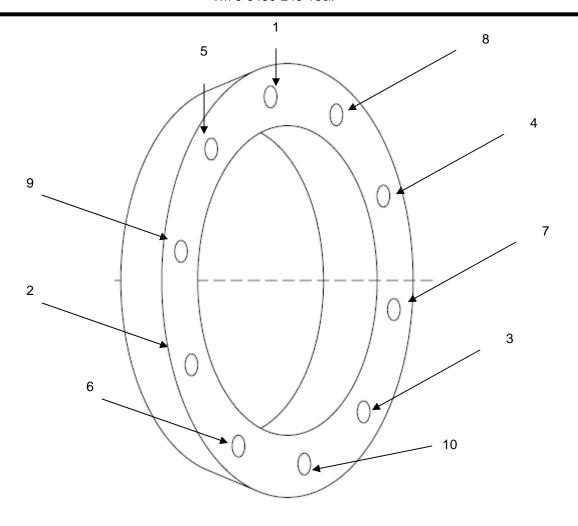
Sequence of socketcap screws installation on the bearing plate.
